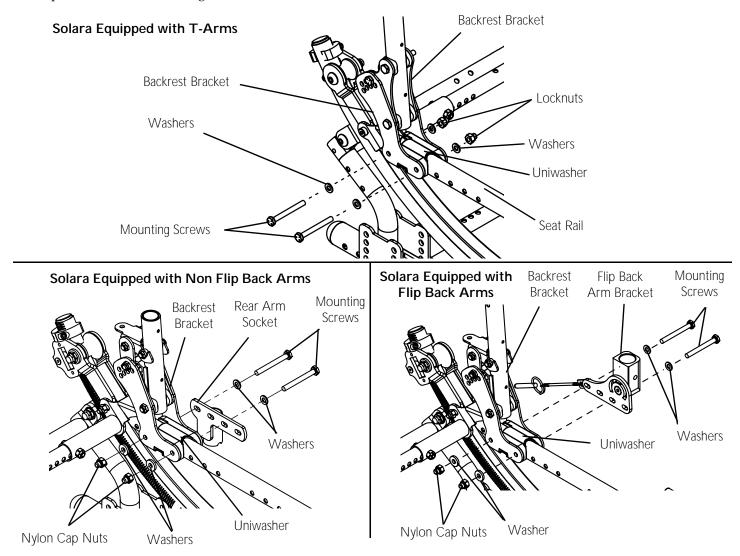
Removing/Installing Backrest Brackets/Back Cane Assembly
